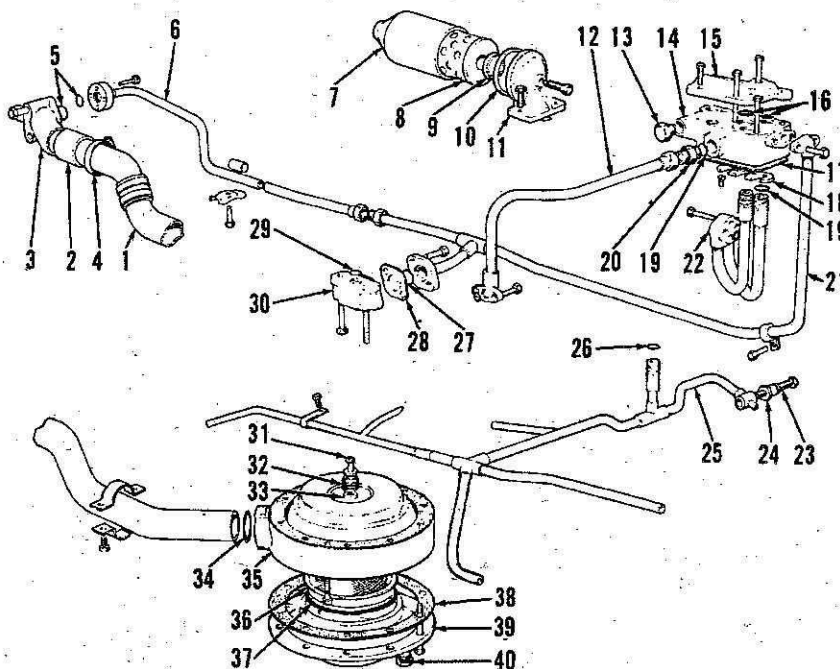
Exploded view of hydraulic lines and filters for model 1200 with single hydraulic pump. Late models with single pump have a full flow suction filter similar to that shown in Fig. 212.
